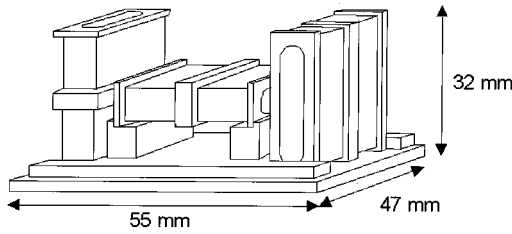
The tri-axial assembly of the Astrid-2 CDC sensor unit. The sensor is further supplied with top and side plates. All parts are made of MACOR to have a mechanically rigid and thermally well-behaved sensor.
